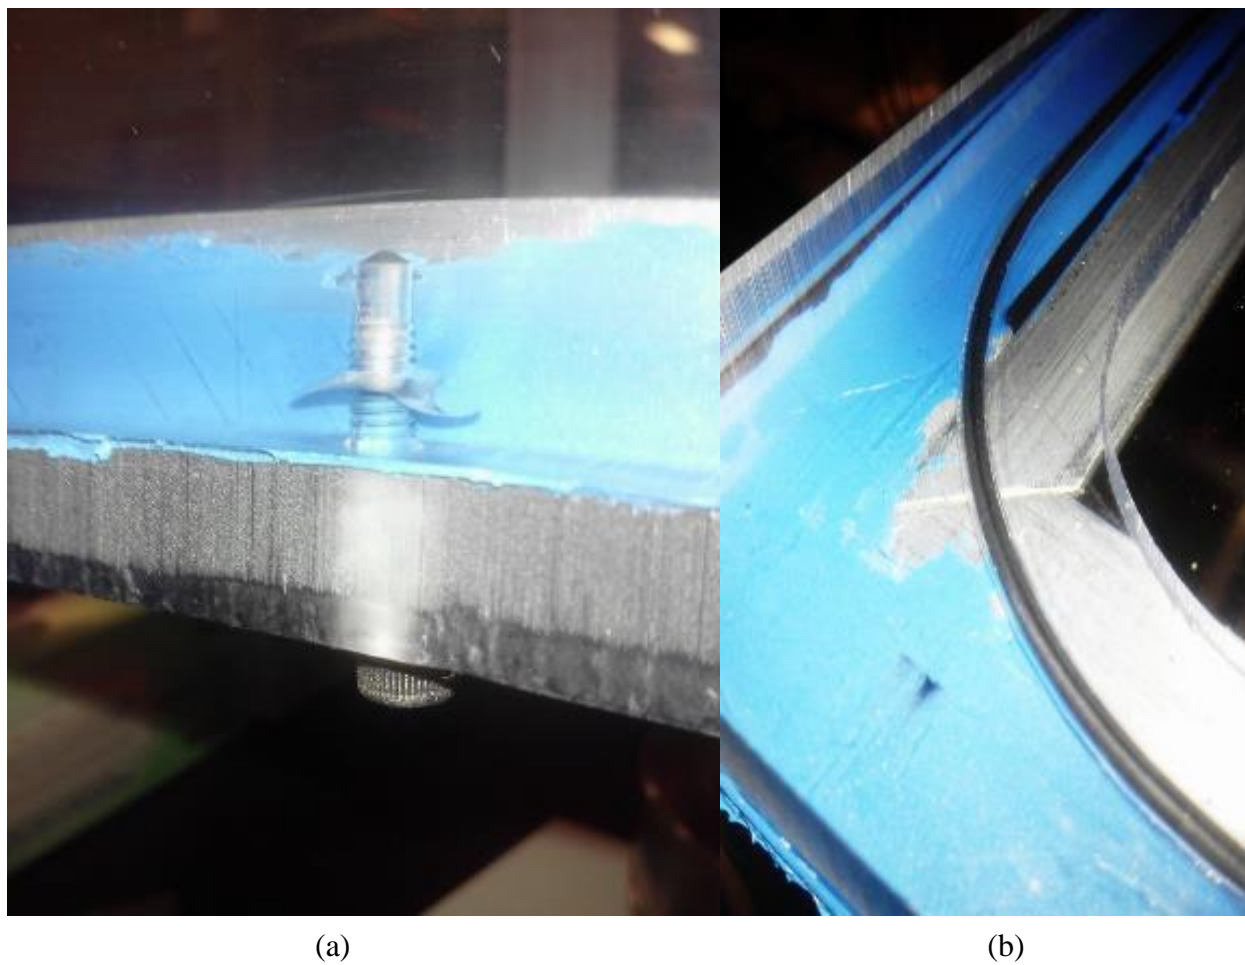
Cracks formed at the threaded bolt holes resulting in catastrophic leaks.
